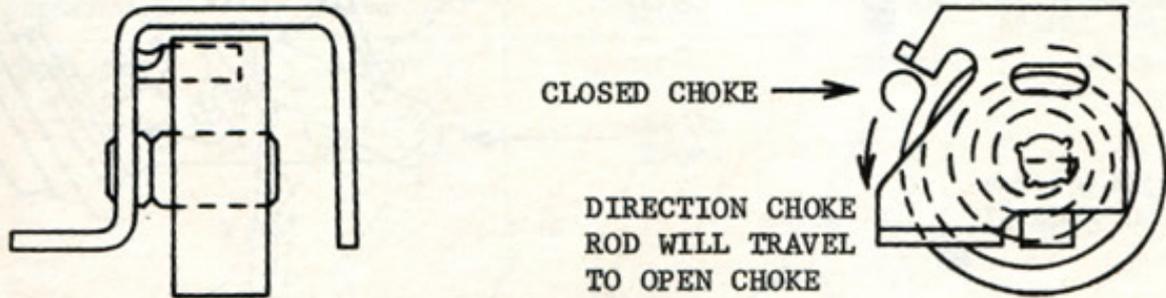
FIG. I - CHOKE THERMOSTAT ASSEMBLY - 283 V-8
